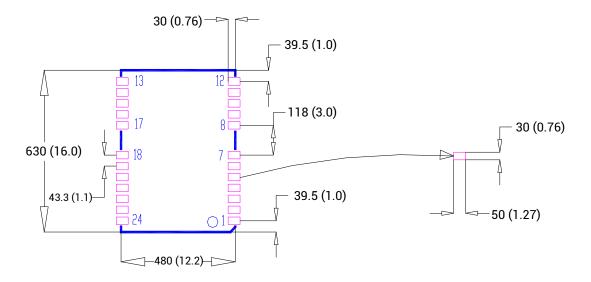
UM621N Recommended PCB Packaging (unit: mil, in brackets: mm)
